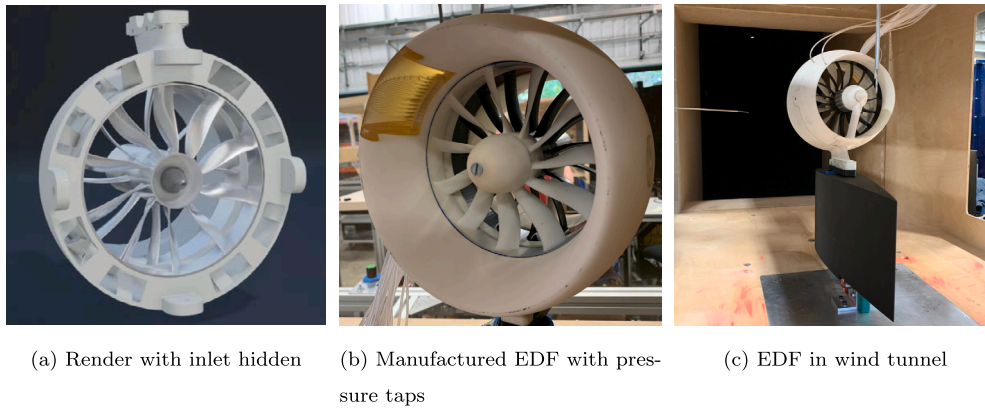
Render and photographs of manufactured EDF assembly and wind tunnel mounting.
